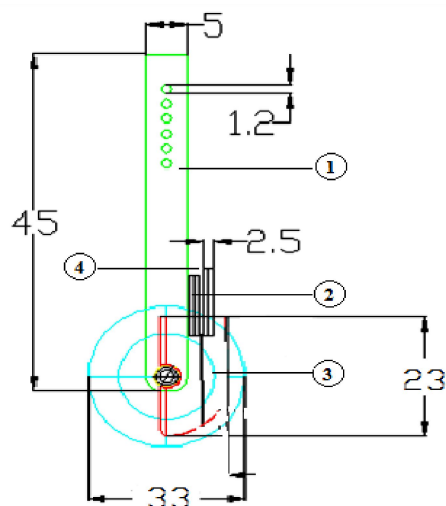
Disk-type furrow opener (1. standard, 2. fertilizer tube (2.5 cm dia) 3. disk furrow opener, 4. seed tube (2.5 cm dia), [All the dimensions in cm]
